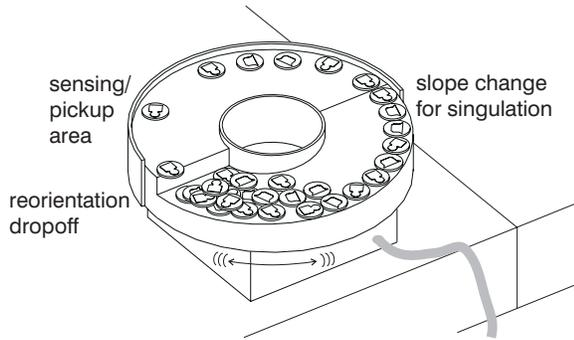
A miniature mobile parts feeder, consisting of a partially sloped annular feed tray (outside edge partially omitted for illustrative purposes) mounted on a planar robot.
